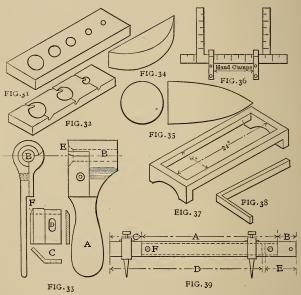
is but a block of wood to hold in the vise when clamping wedge-shaped or tapering
